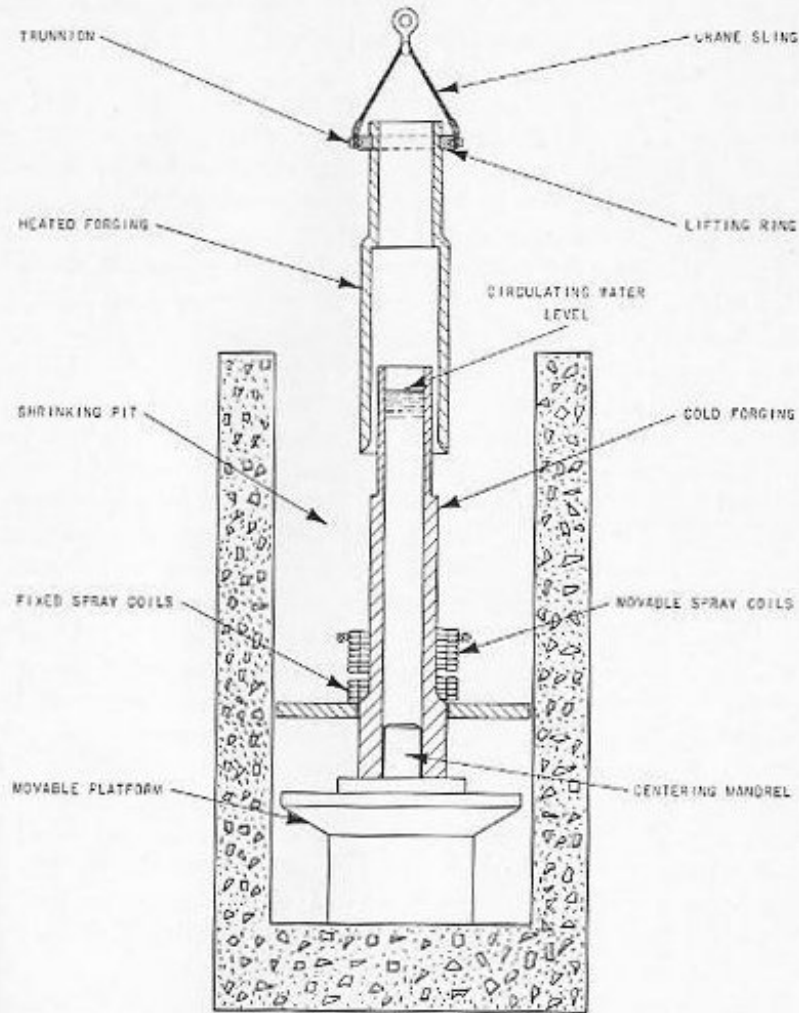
SHRINKAGE PIT—SHOWING HEATED FORGING SUSPENDED AND READY FOR ASSEMBLY.
